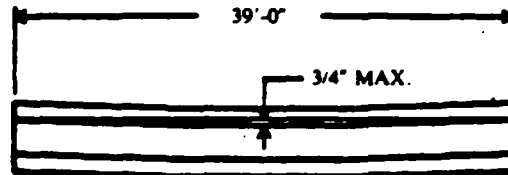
Top View of Uniform Lateral Sidesweep Tolerance per Section 13.6.
